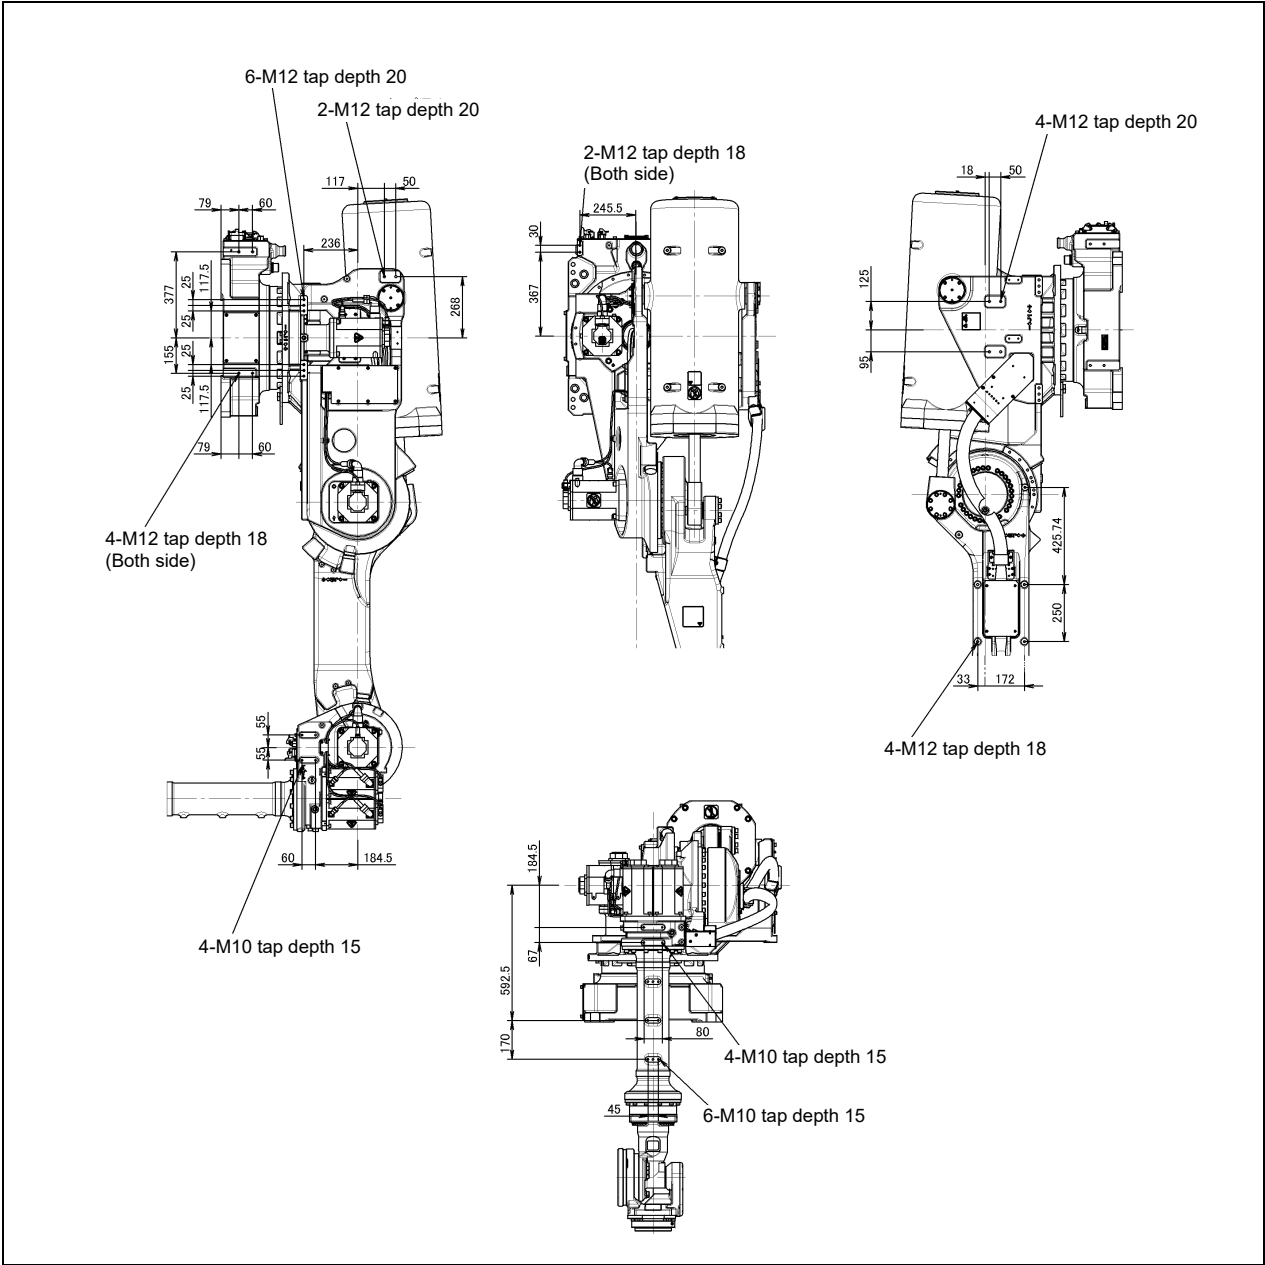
(d) Equipment mounting faces (R-2000iB/200R)
